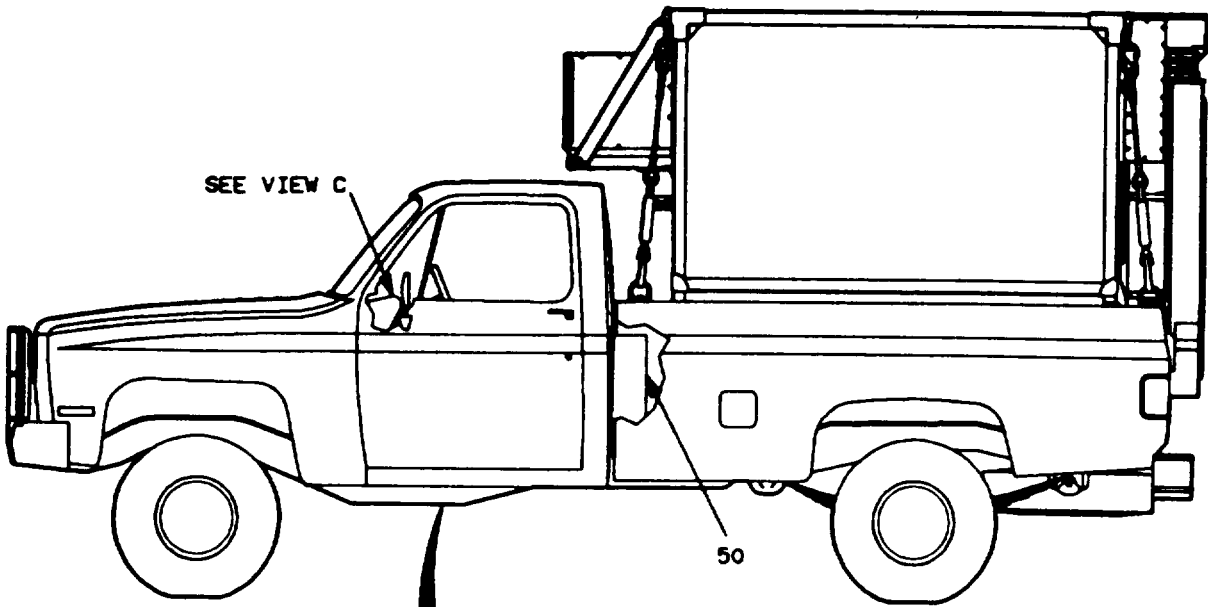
SHELTER ASSEMBLY (SHEET 3 OF 24)
